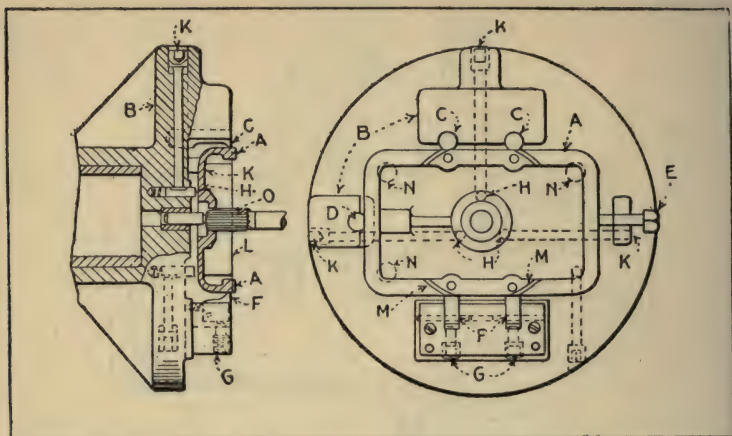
FACE-PLATE FIXTURE FOR A THIN ALUMINUM CASTING
